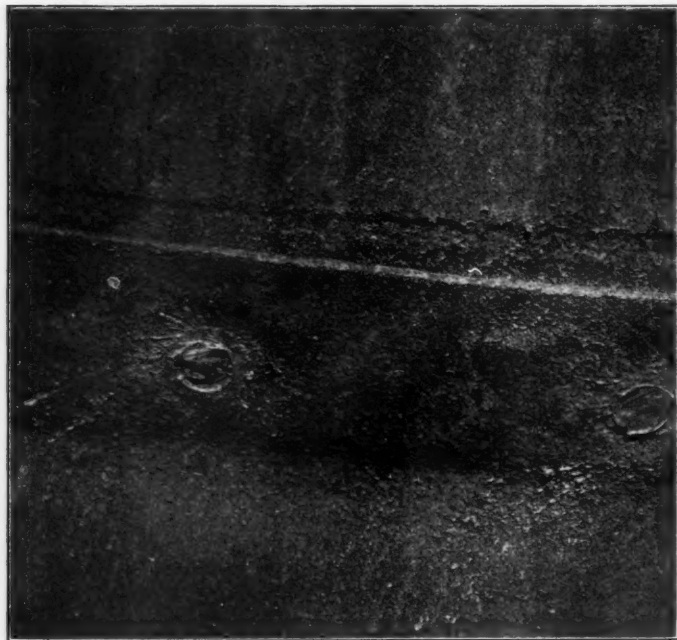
Rivet Heads Are Cut Off Flush, but Plate Is Not Injured by Oxy-Acetylene Flame.
